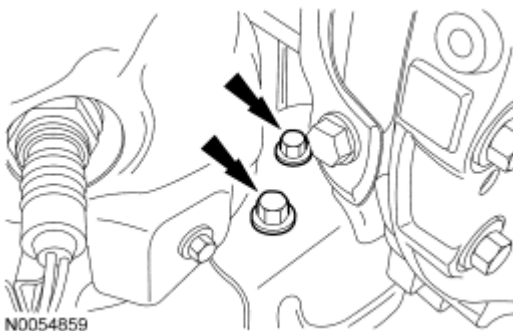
Locating LH Catalytic Converter Bracket Bolts
